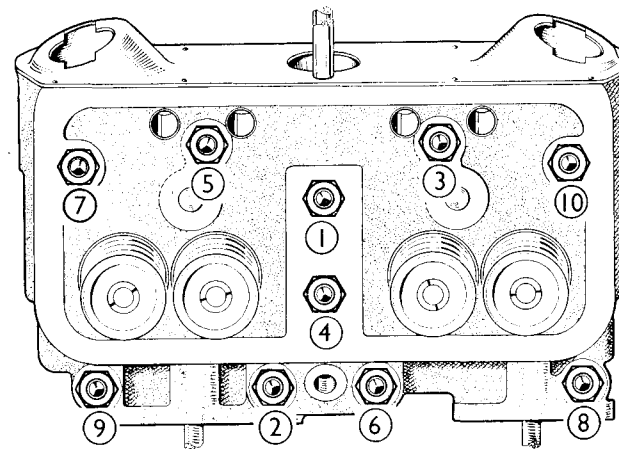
TIGHTENING ORDER CYLINDER HEAD NUTS
